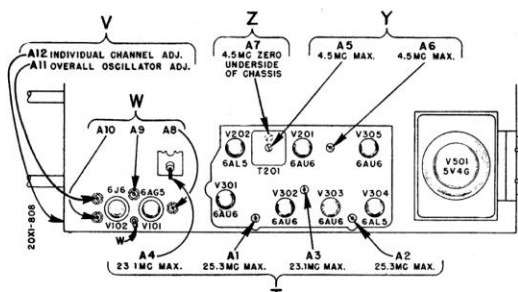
Top View of Chassis Showing Alignment Adjustment Locations.
